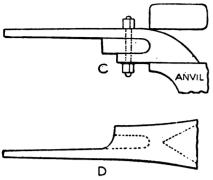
METHOD OF FORGING A NEW SHOVEL TOOTH.
